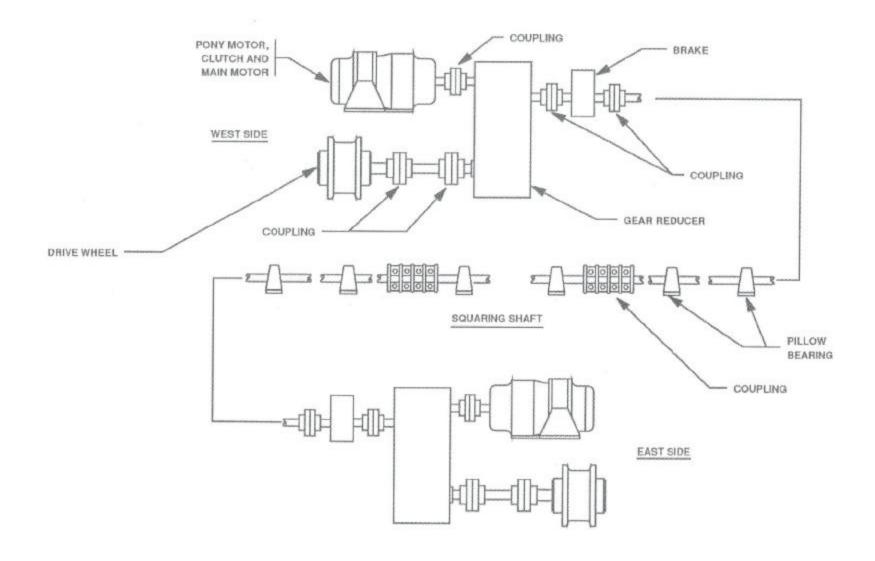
30-Ton Bridge Cranes, Bridge Drive Assembly
